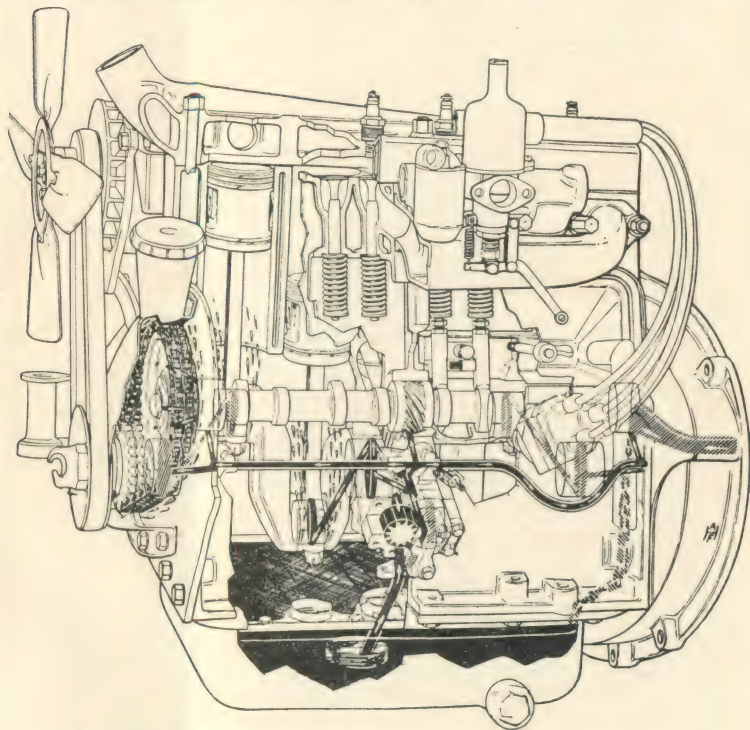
MORRIS SIDE-VALVE ENGINE LUBRICATING SYSTEM
